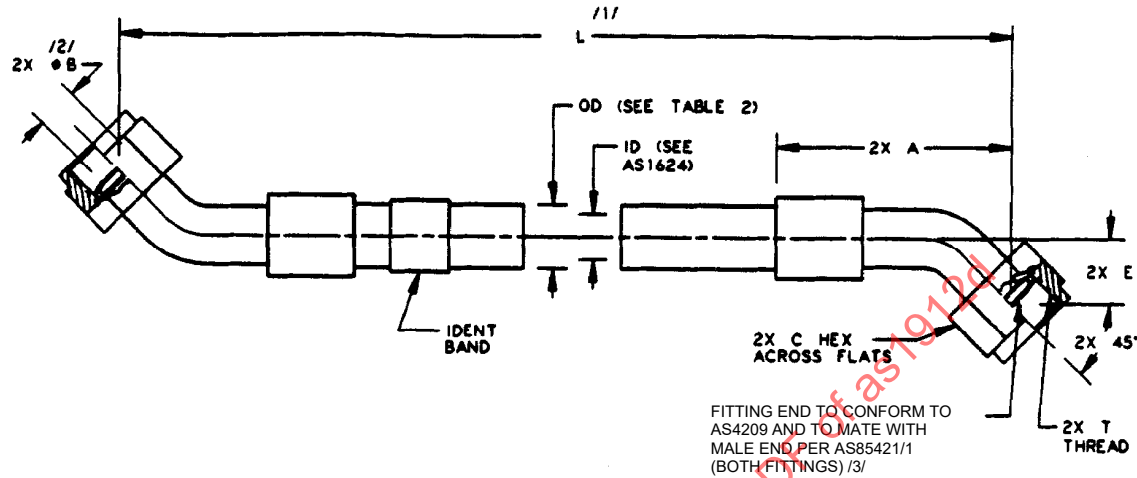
HOSE AND FITTING DIMENSIONS
